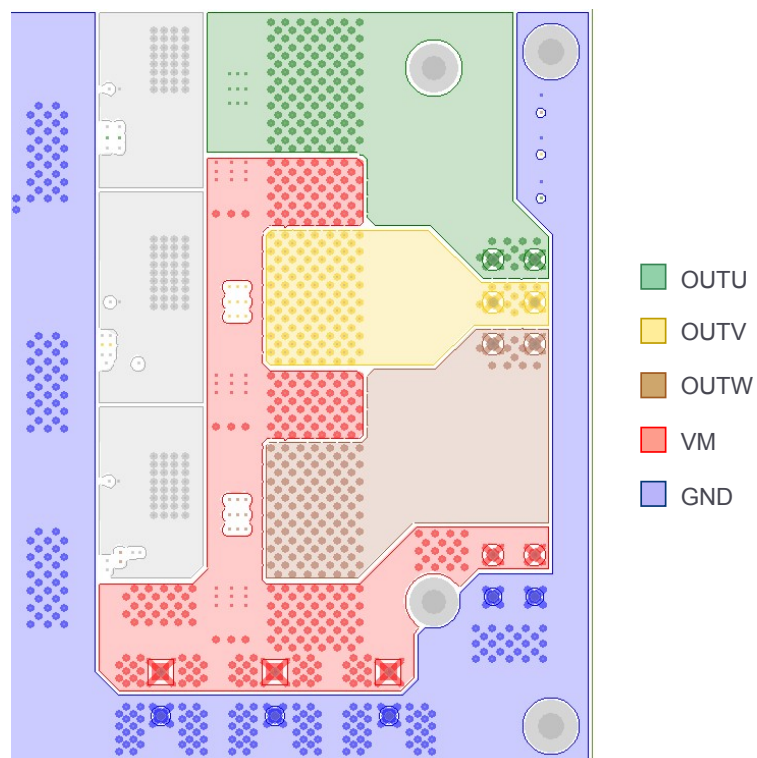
EVALSTDRIVE101 2nd inner layer PCB
